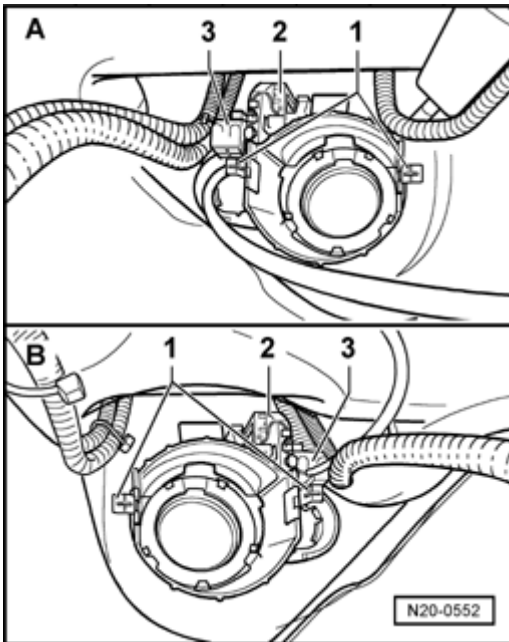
Identifying Suction Jet Pump, Fuel Level Sensor & Retaining Clips
